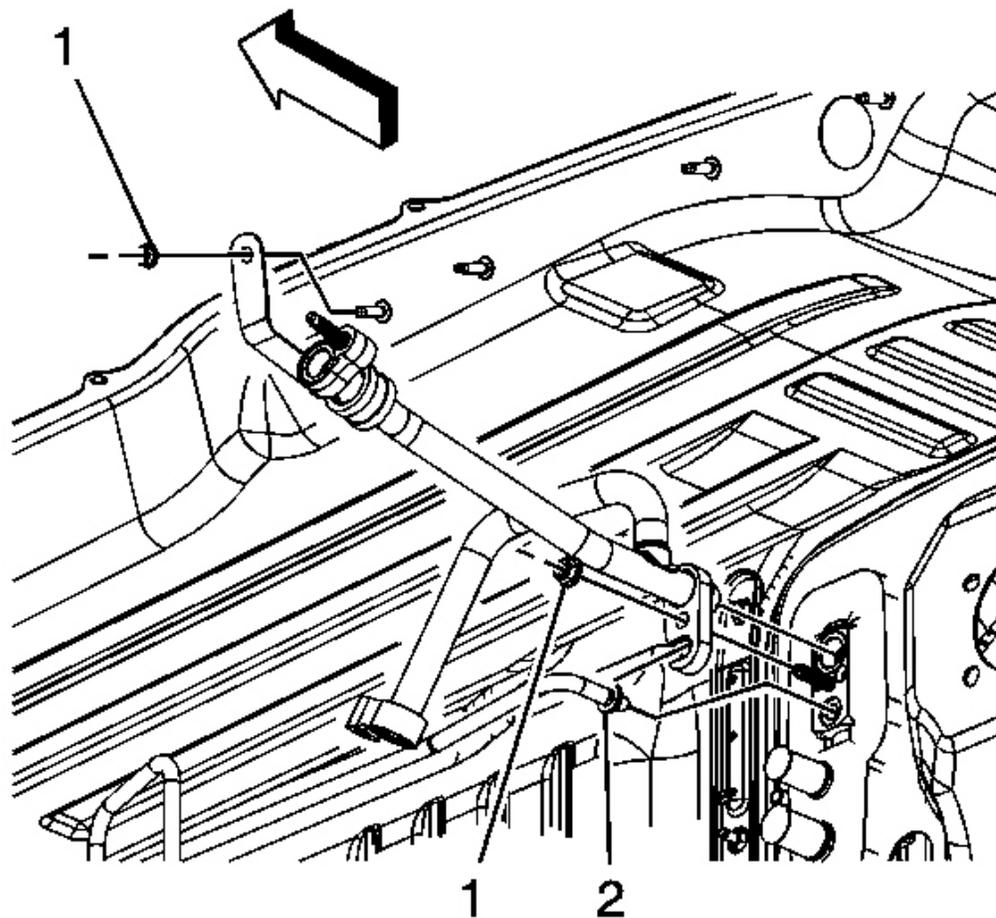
Identifying Liquid Line Attaching Nut & Evaporator Hose/Tube
